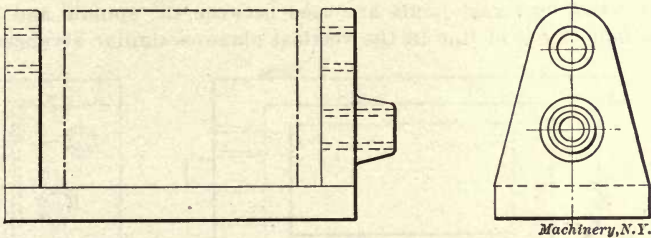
Boring Jig in which One Bar has Single and One Double Bearing
